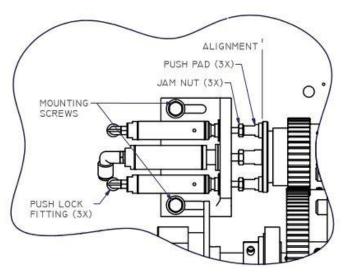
Push Pad Cylinder Assembly Diagram
